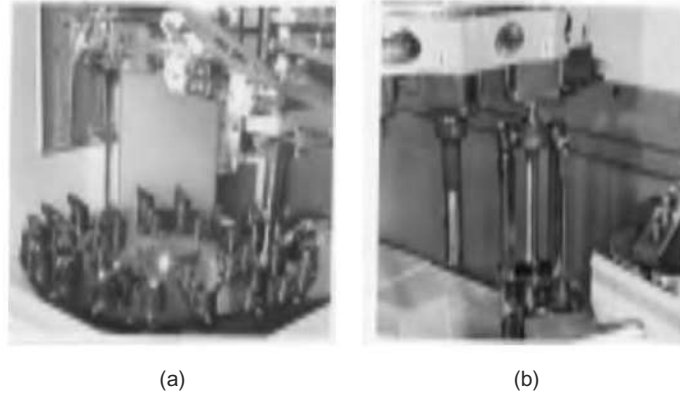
Disc-type tool magazine used in CNC turning centres with modular tooling along with a tool-change arm (Courtesy, Boehringer, Germany)
